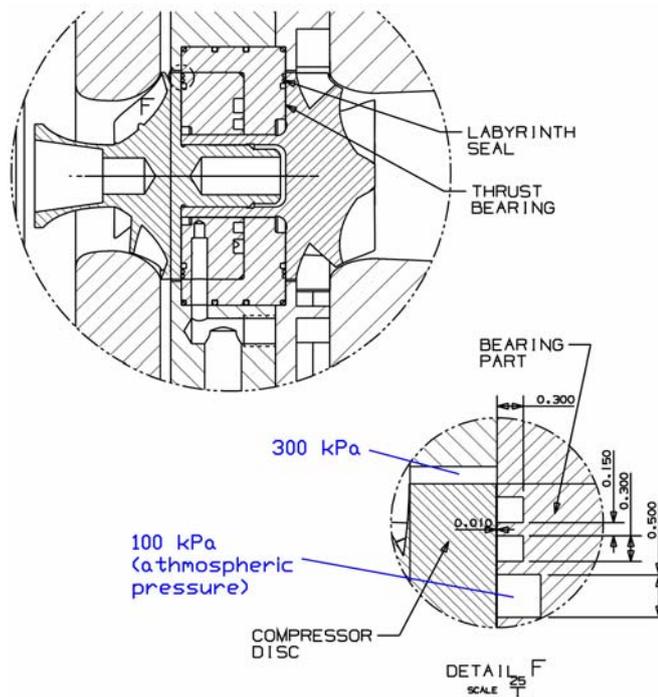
Section view of air bearing unit and labyrinth seal detail view.
